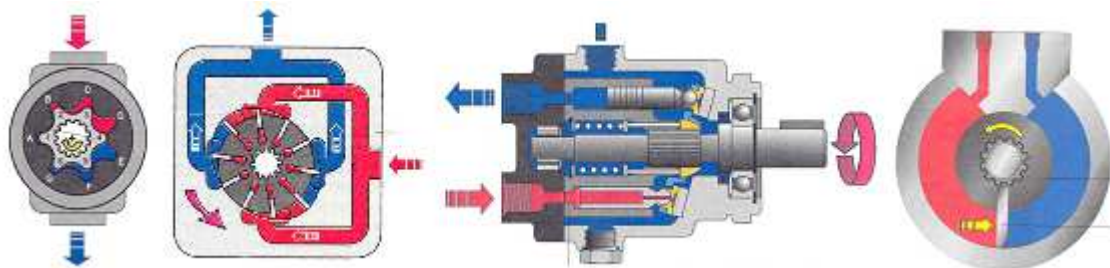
Hydraulic motors: a) gear motor b) vane motor c) piston motor d) limited rotation actuator
